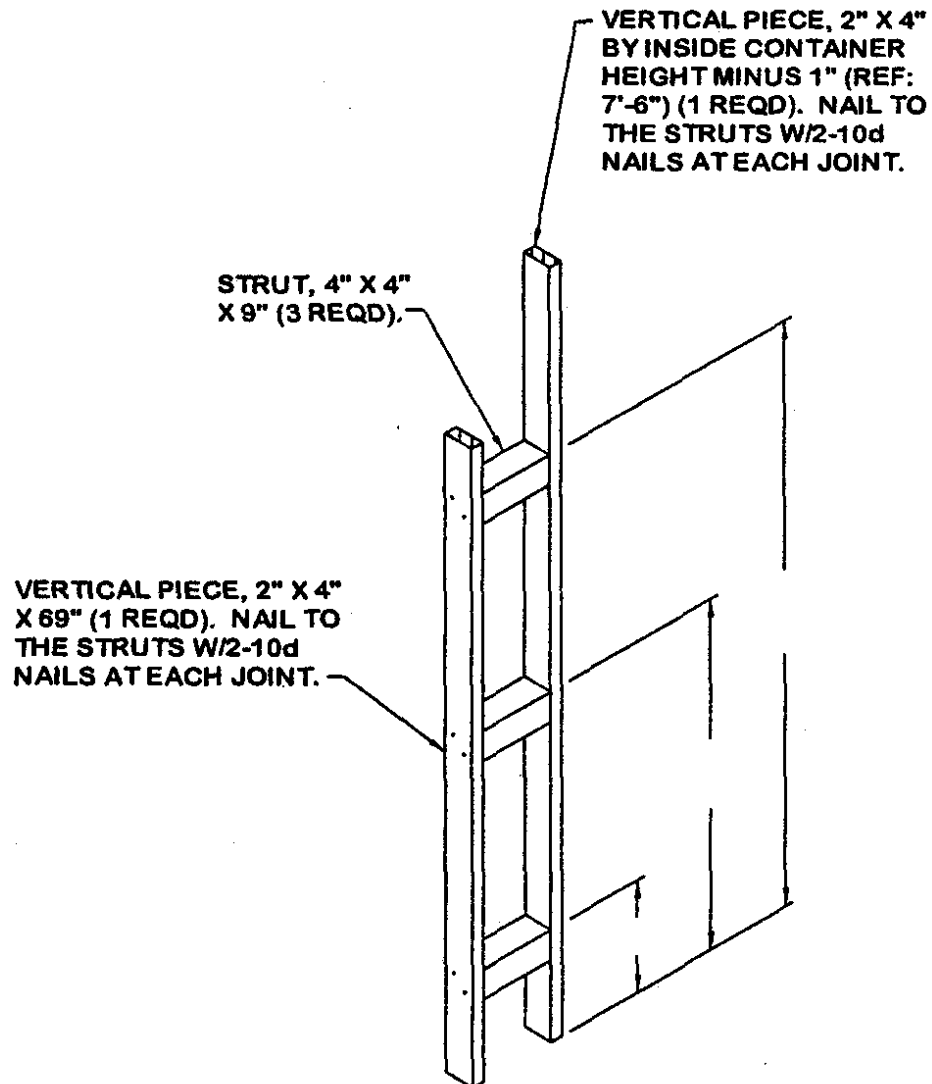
Examples of strut assemblies (sheet 1 of 3).
